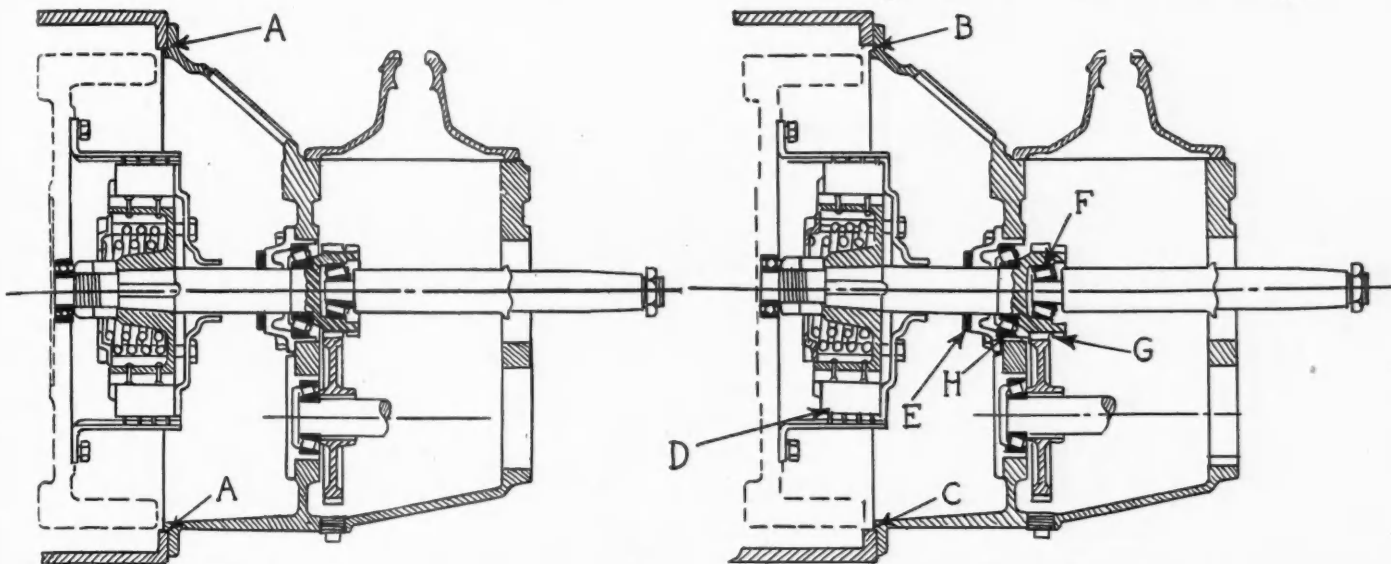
Two cross sectional views of a clutch and transmission, showing in the one case a correct fitting of the transmission pilot into the engine flywheel housing. Note that there is no misalignment, the clutch and pilot bearing are in proper position and all parts are in proper relation
